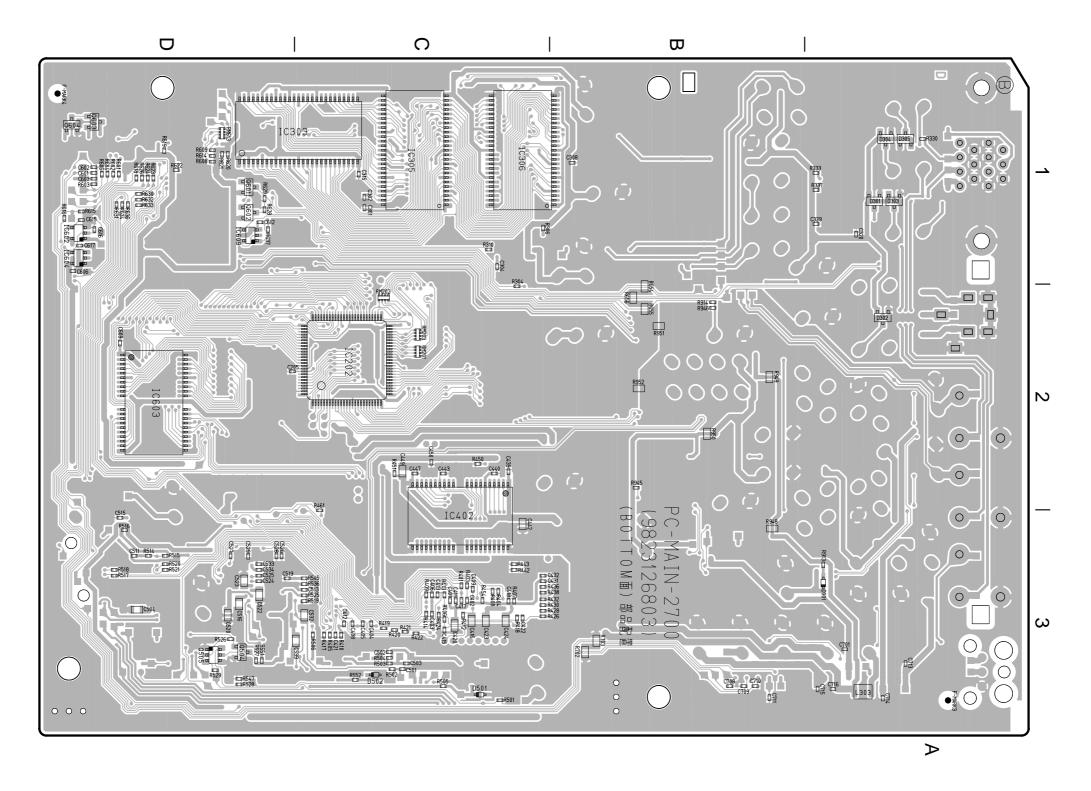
EU01 Main PC Board (Bottom pattern and bottom parts location diagram)
